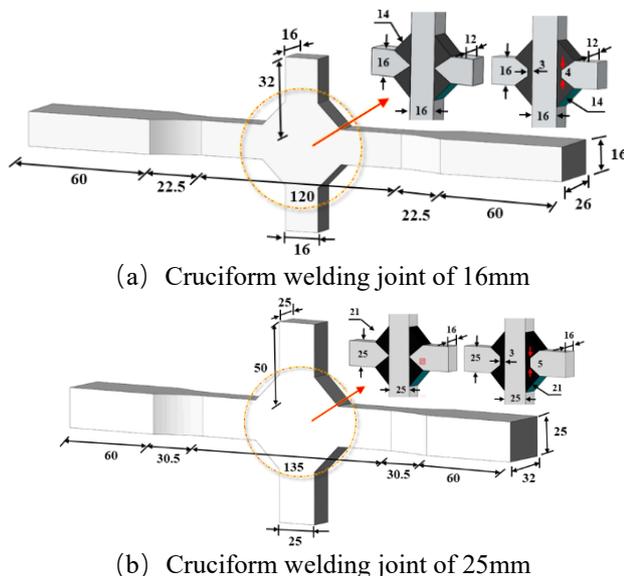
Fatigue specimen configurations for cruciform welding joint with different thickness
